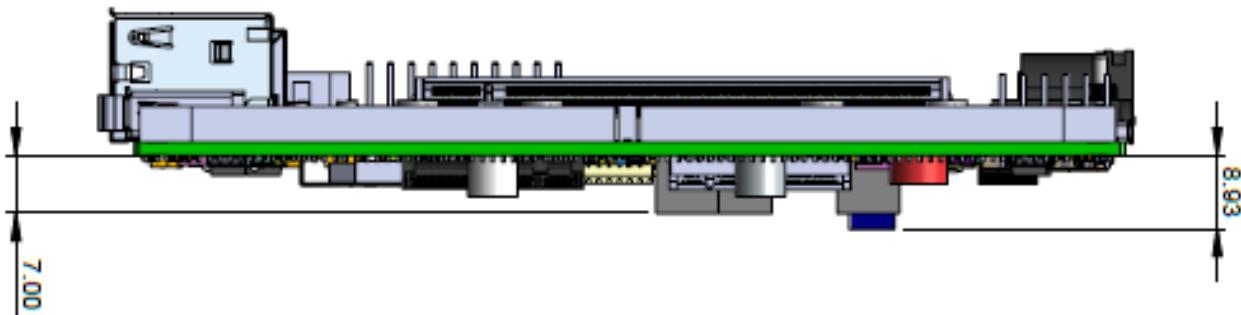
Mechanical dimensions of i.MX 8 QM/QP Qseven Carrier Board - Side View
